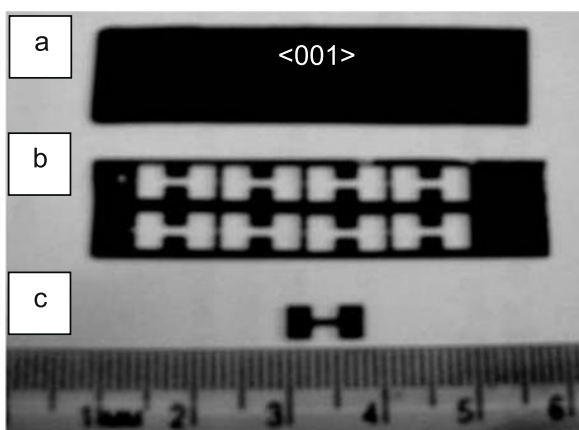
Method adopted for the fabrication of microtensile specimens: (a) PtAl coated 0.5 mm thick superalloy strip, (b) wire EDM machining of samples from the coated strip and (c) a typical cut out microtensile sample.
